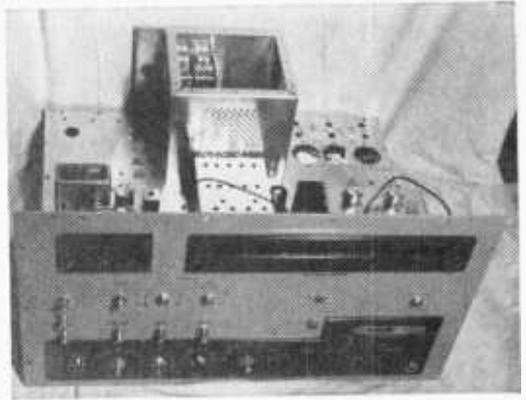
Beginning to look like a completed unit, the front panel is mounted and switches installed. Meter and dial installed, along with final amp shield.
